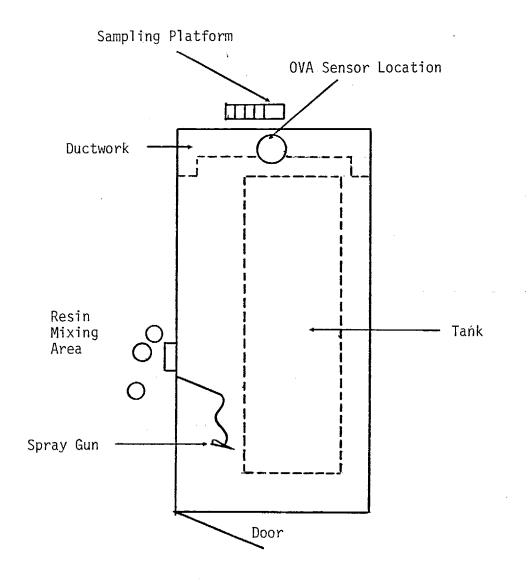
Plant Layout at Facility B (Scale: 1" = 10').
